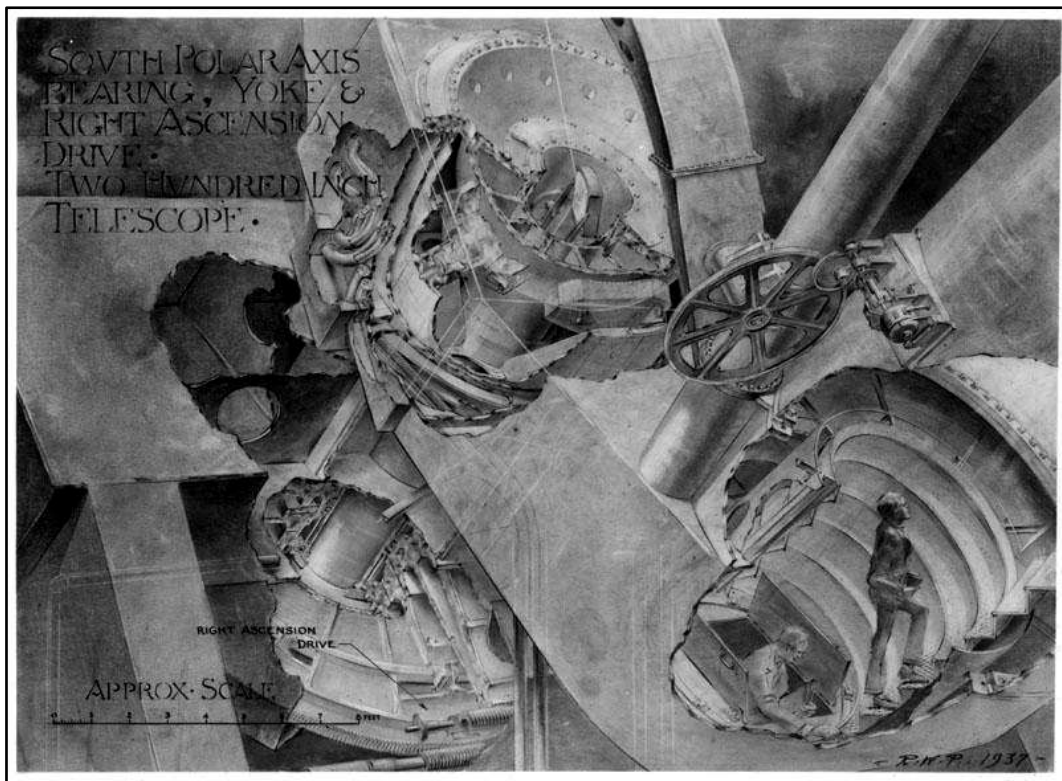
South polar-axis bearing, yoke, and right ascension drive gears. General view of the south end.
